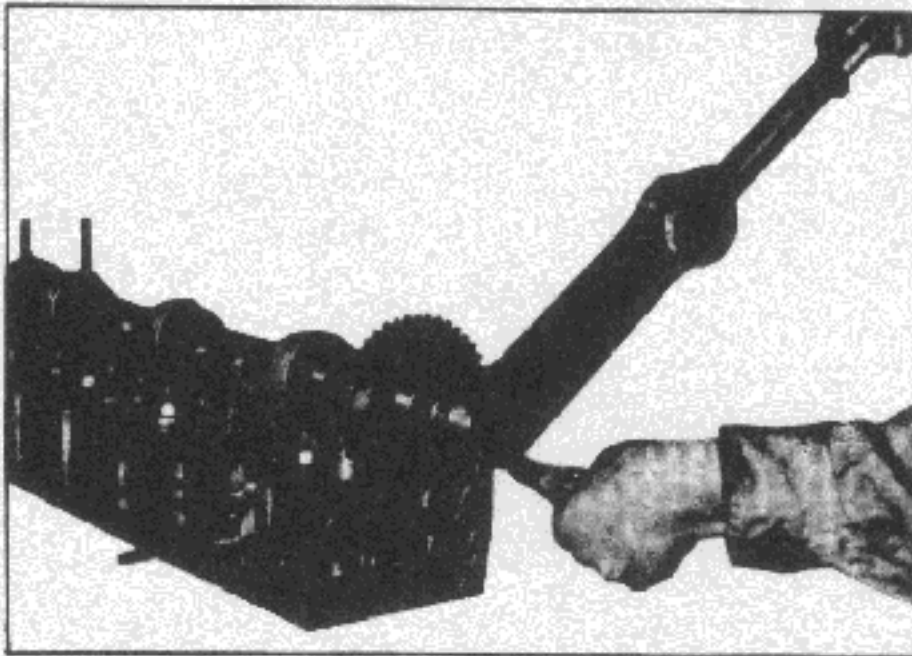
Camshaft sprocket installation (L20 engine)
